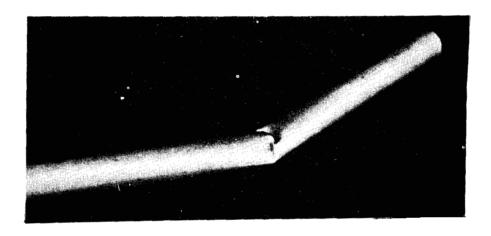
BENDING BUCKLE (D/t= 49.0)
